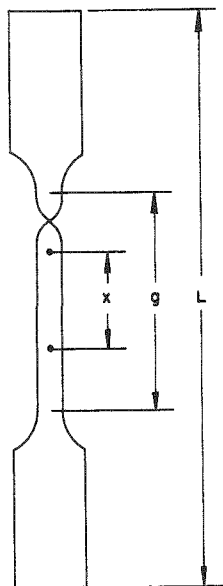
Diagram of Specimen Broken Outside Extensometer Gauge.
